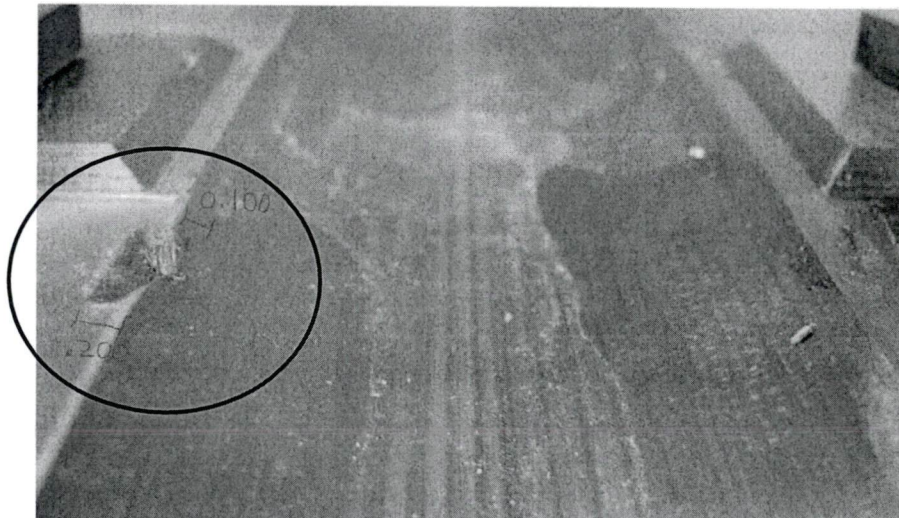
Damages caused by Bolt Head Interference after first Installation
